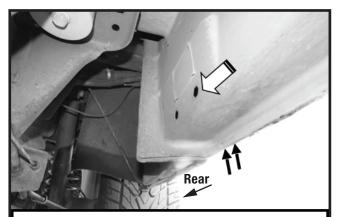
Attach Support Bracket [F] to Mounting Bracket [B] and center pinch weld mounting locations. For the <u>2009-12</u> models not equipped with factory holes on pinch weld, DO NOT drill through pinch weld at this time, see STEP 3 for drilling instruction
